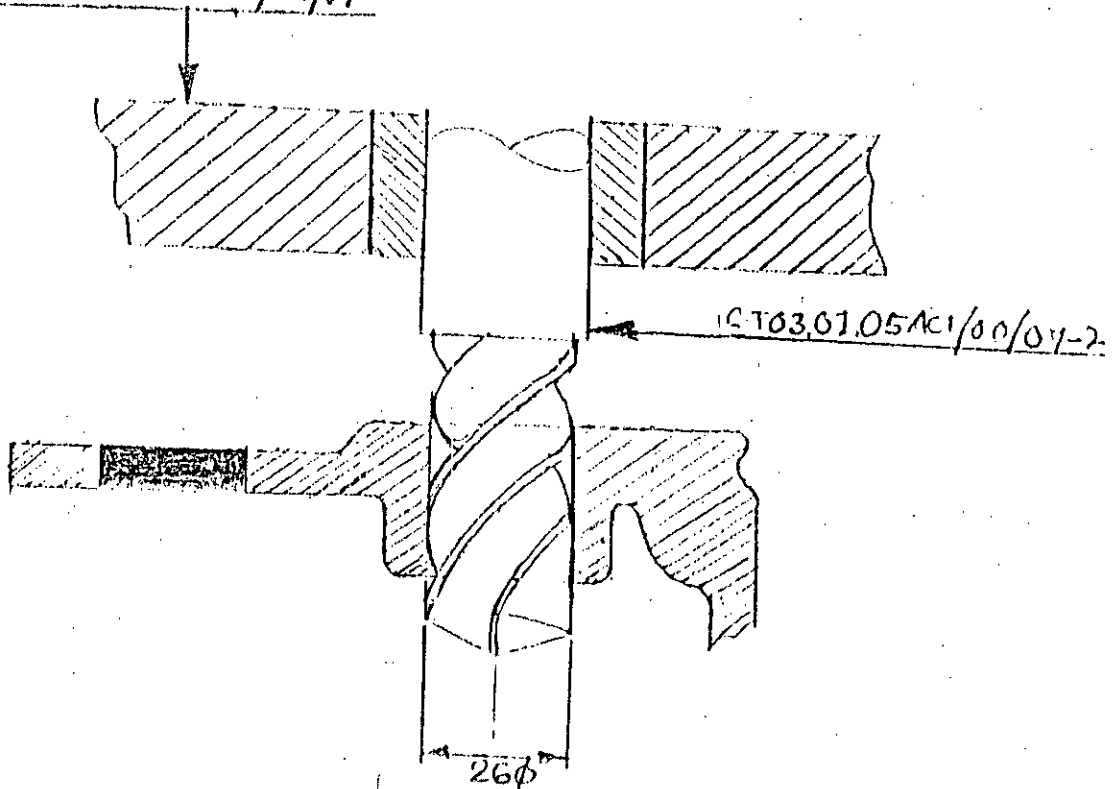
DRILLING OPERATION OF HOLE ϕ 26
